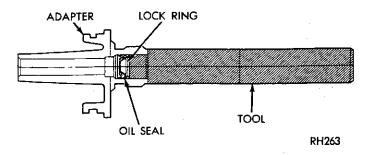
Installing Adapter Oil Seal And Lock Ring
